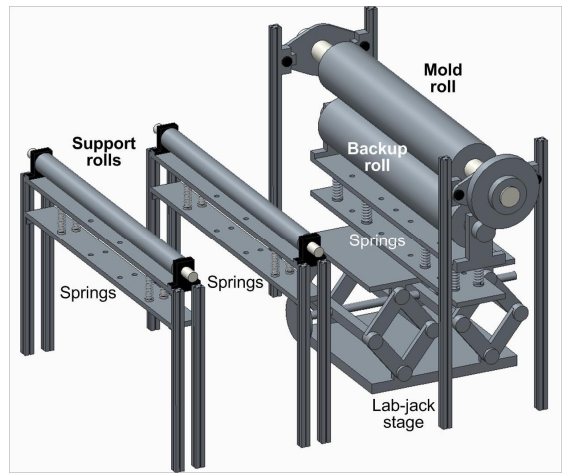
3D CAD drawing of an imprinting module; the mold roll and backup roll are responsible for pressurized imprinting, while the support rolls help secure uniform and continuous substrate feeding.
